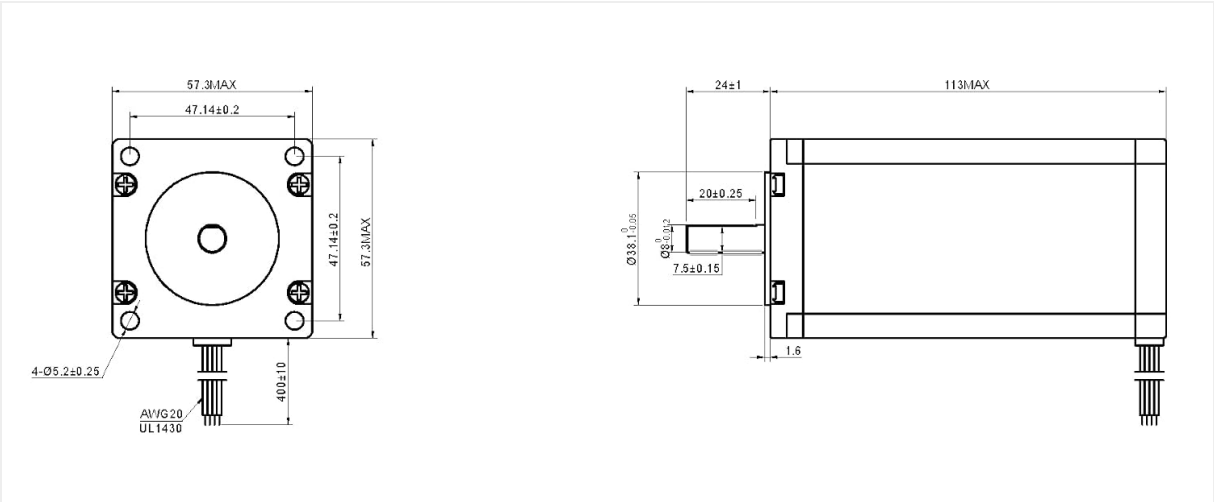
Technical dimension drawing of the STEPPERONLINE Nema 23 Stepper Motor, showing key measurements.
